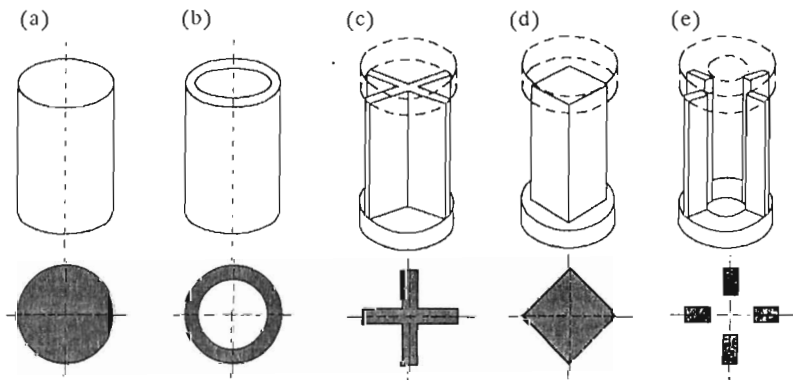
Mechanical transducers; segments of shafts with different cross-sections; (a) – circle, (b) – ring, (c) – cruciform, (d) – quadratic, (e) – "drilled" cruciform (system of flat springs)
